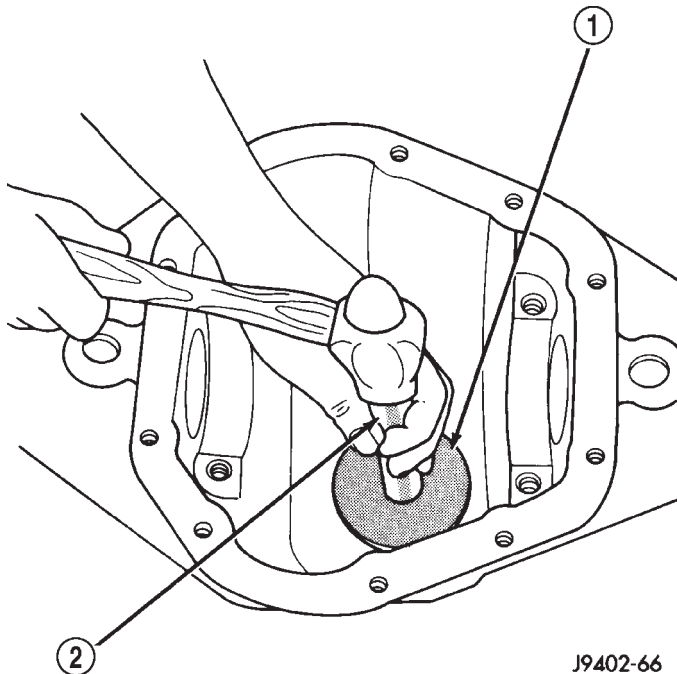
Pinion Rear Bearing Cup Installation J9402-66
